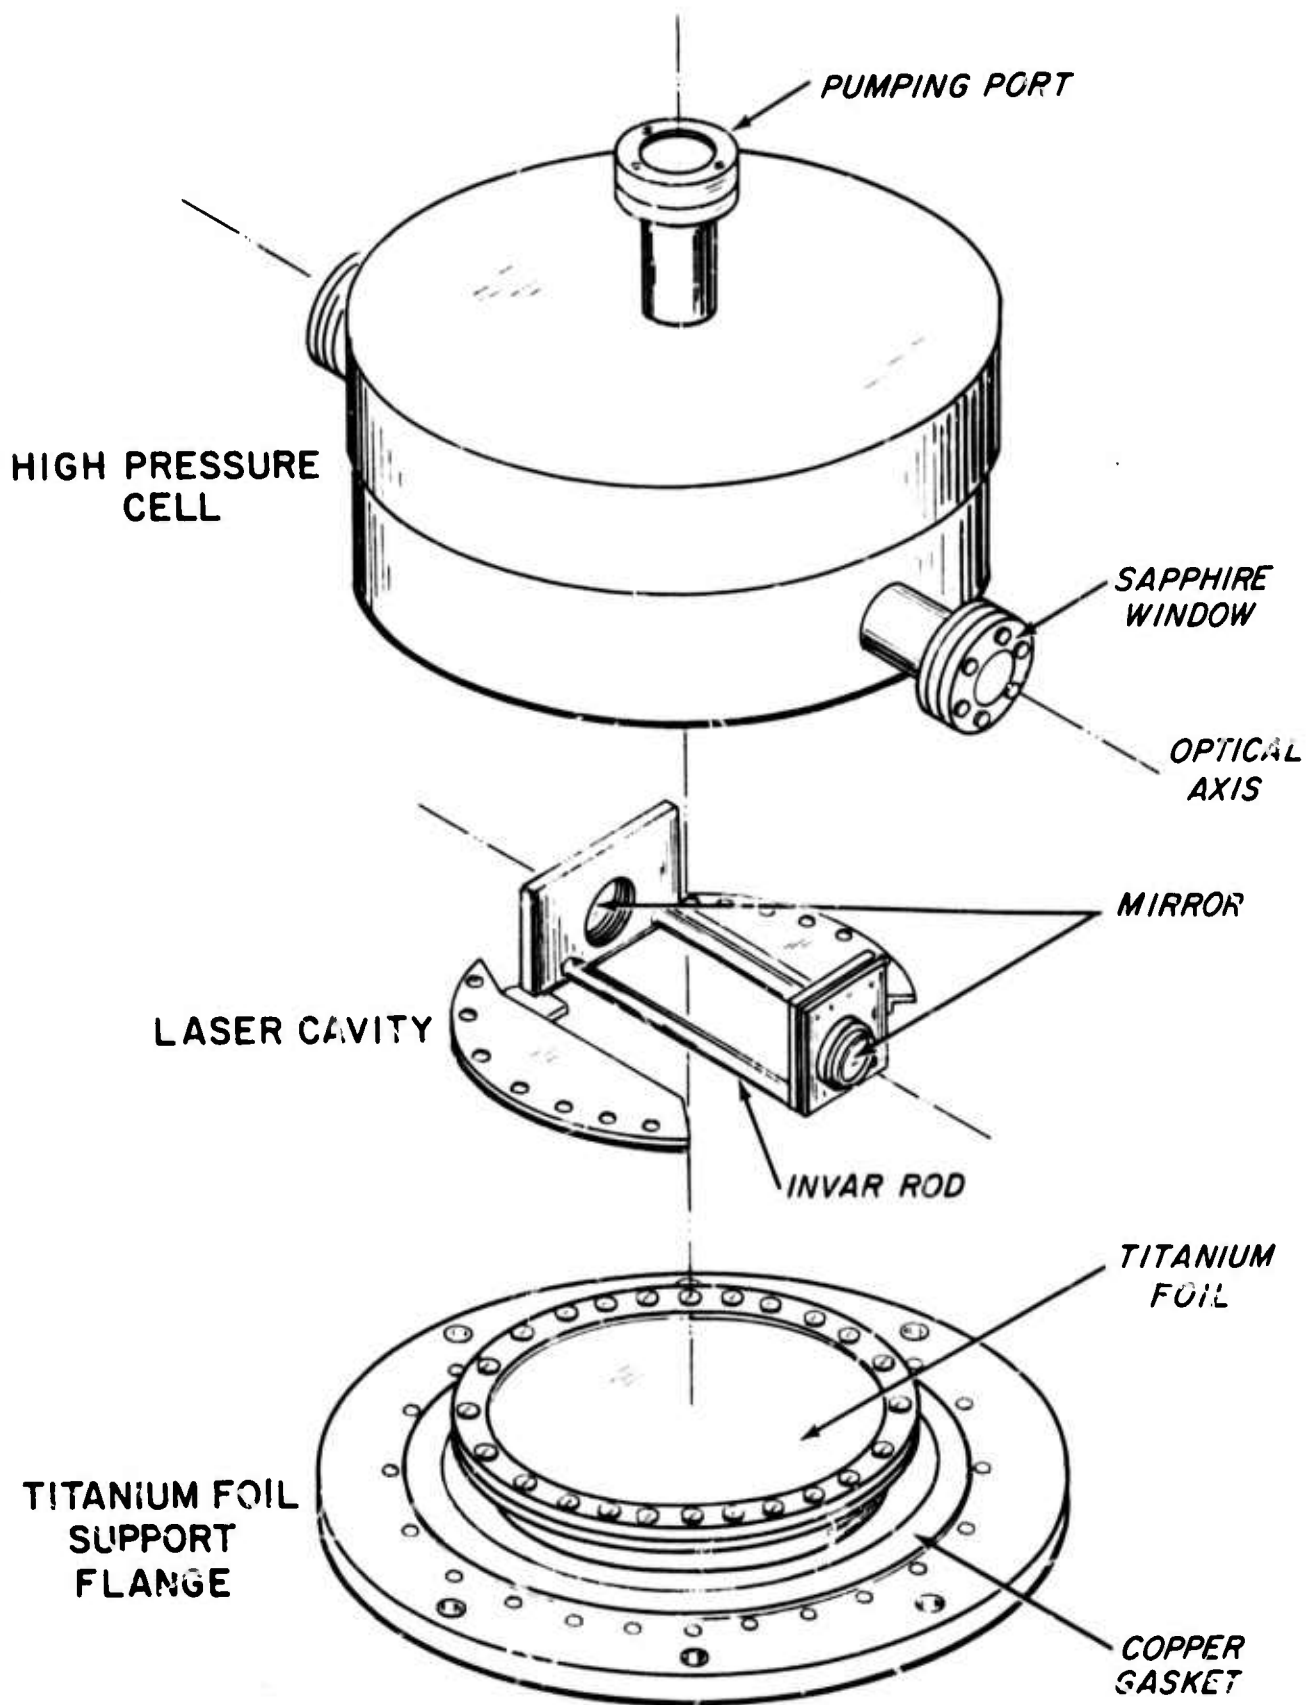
Exploded view of the e-beam laser afterglow chamber (ELAC-1) supporting the nitrogen ion laser work described here.
